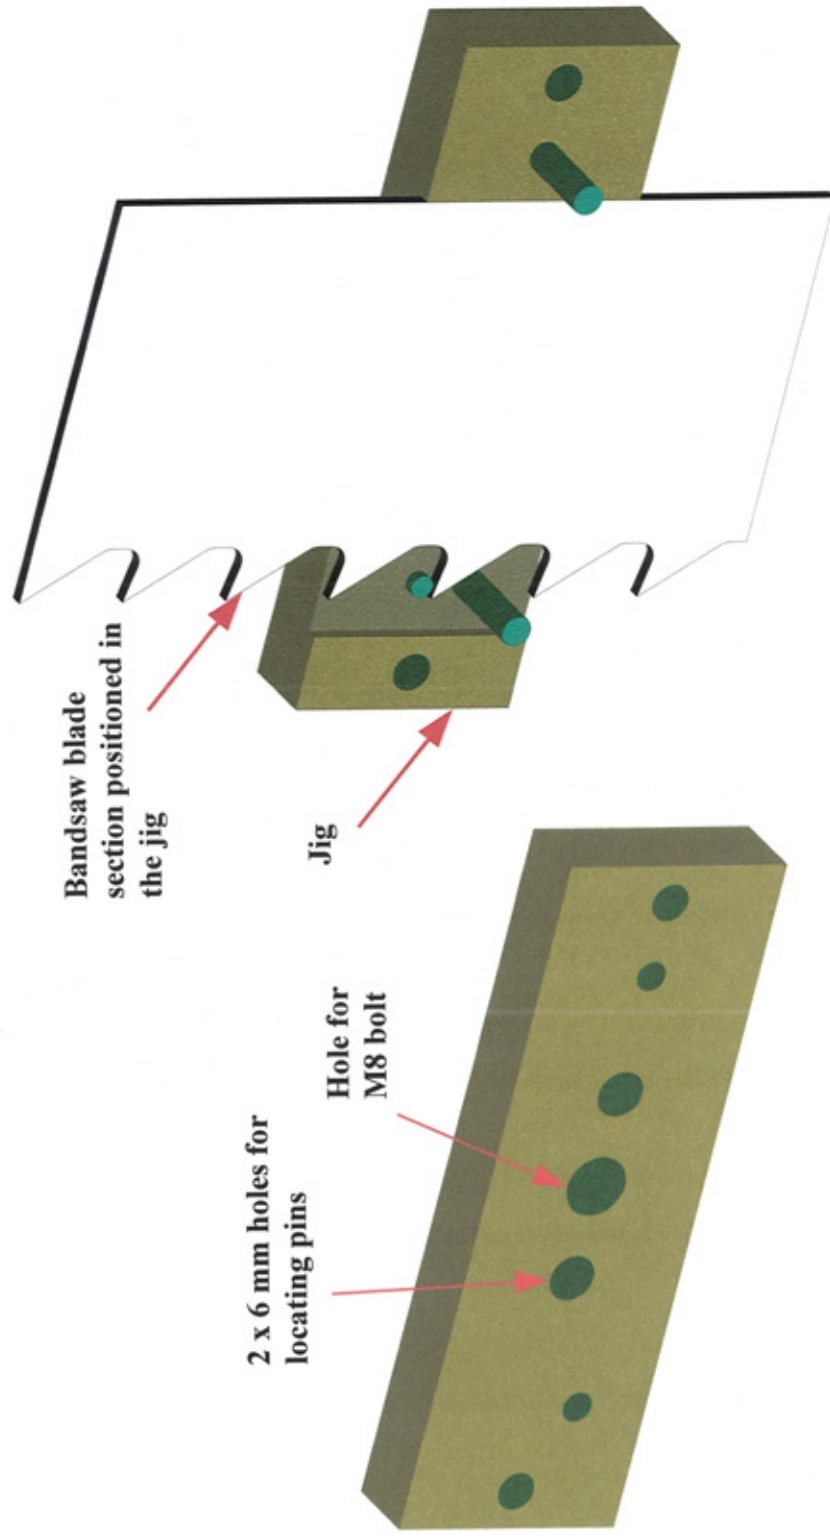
Jig for drilling holes through the single tooth sample to enable mounting of sample to the tool holder
